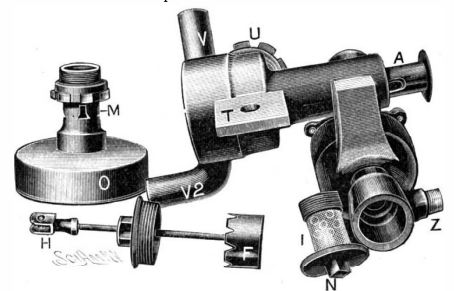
PRINCIPAL PARTS OF THE CARBURETER.
